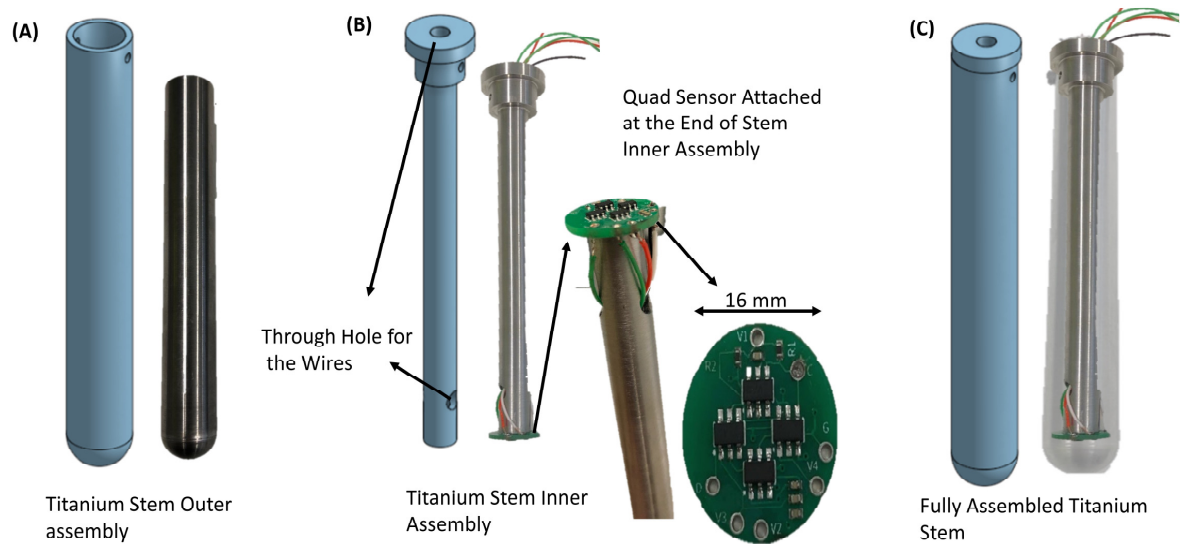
6: Showing the Solidworks designed model and actual fabricated parts for (a) the outer shell of the titanium stem having a length of 150 mm and diameter of 20 mm. (b) the inner tube of the humeral stem along with printed circuit board (PCB) of the Quad Sensor configuration. (c) The assembly for the humeral stem.
